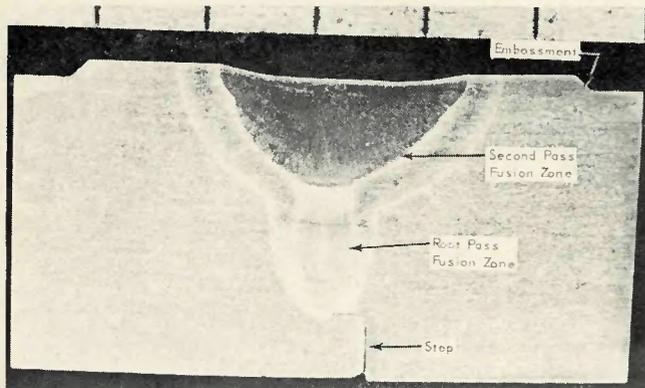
Transverse-section profile of a completed two-pass, partial-penetration, electron beam weld. Note 20 mil thick embossment which was added to facilitate groove fill-up
